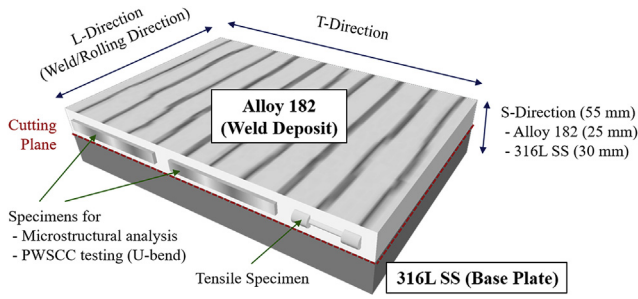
Schematic of Alloy 182 weld deposit and direction of specimens.
